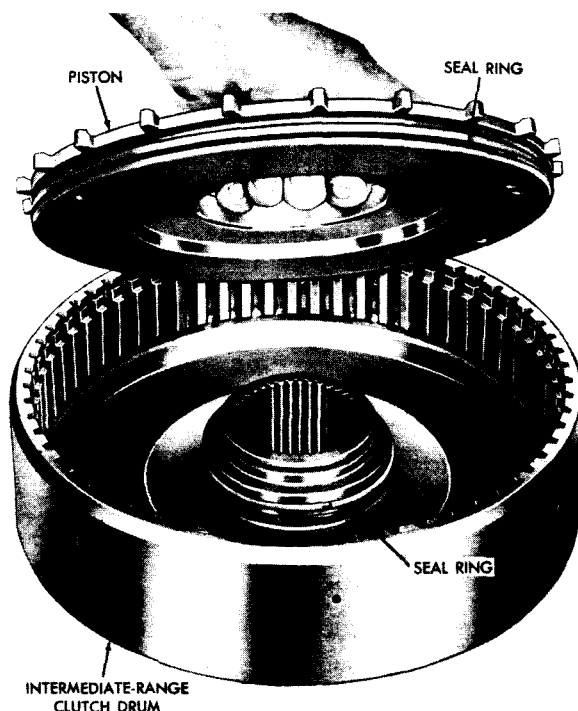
Removing (or installing) intermediate-range clutch piston assembly
